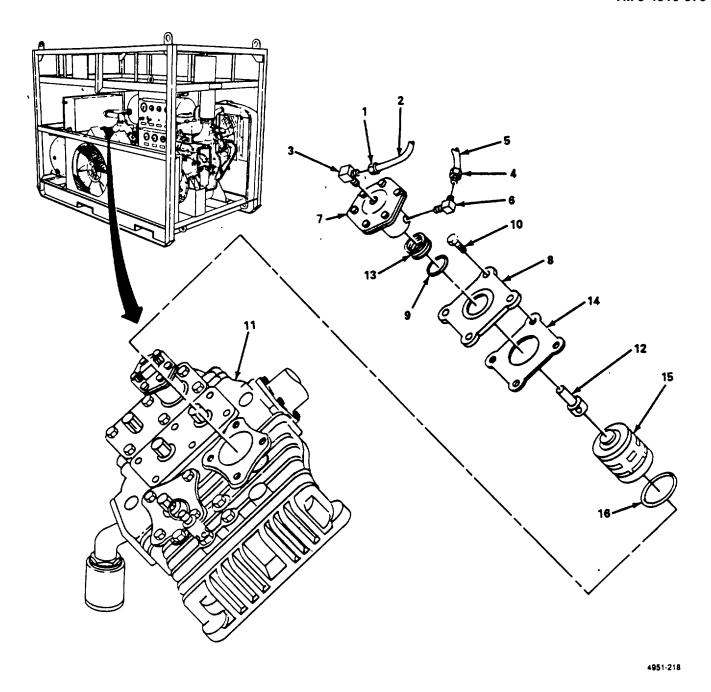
Compressor Unloader Assembly With 4 Bolt Flange, Removal.
